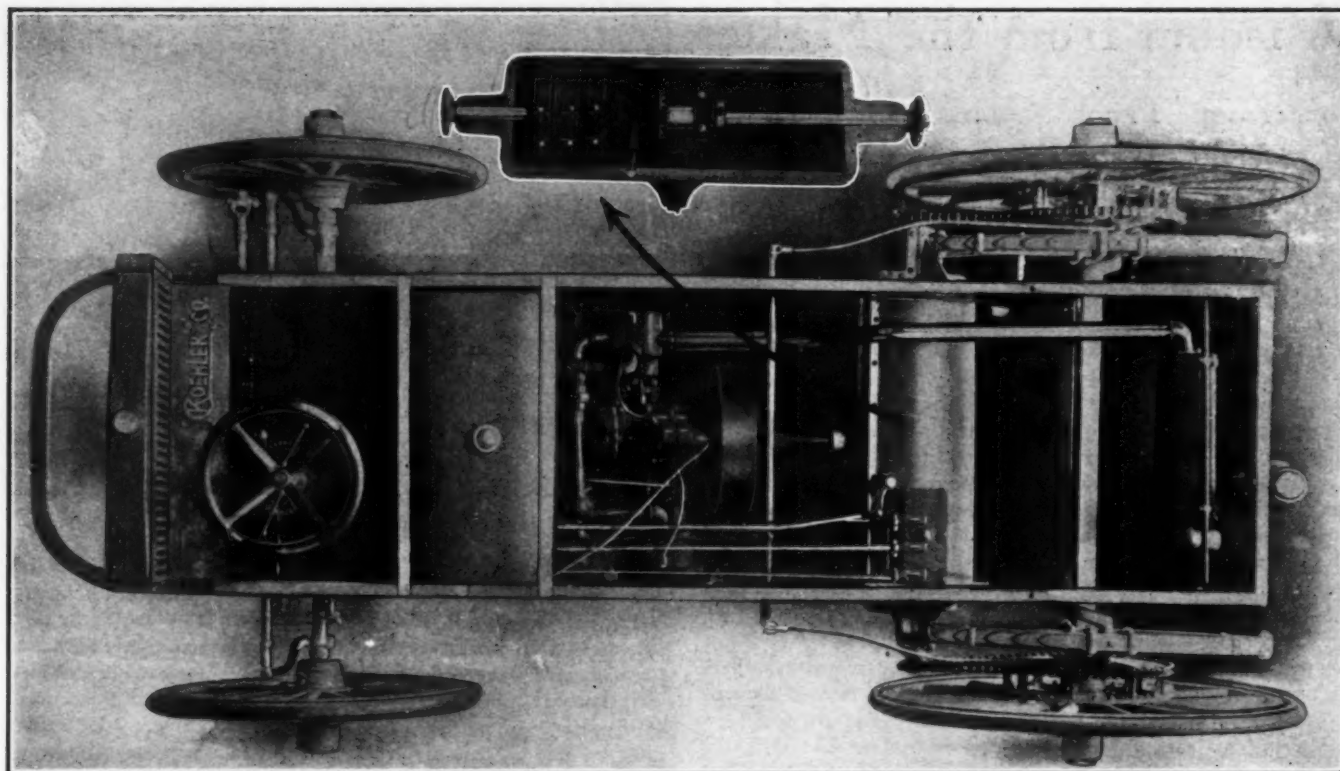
Plan view of the chassis of the Koehler commercial car, with detail of the planetary gearset
